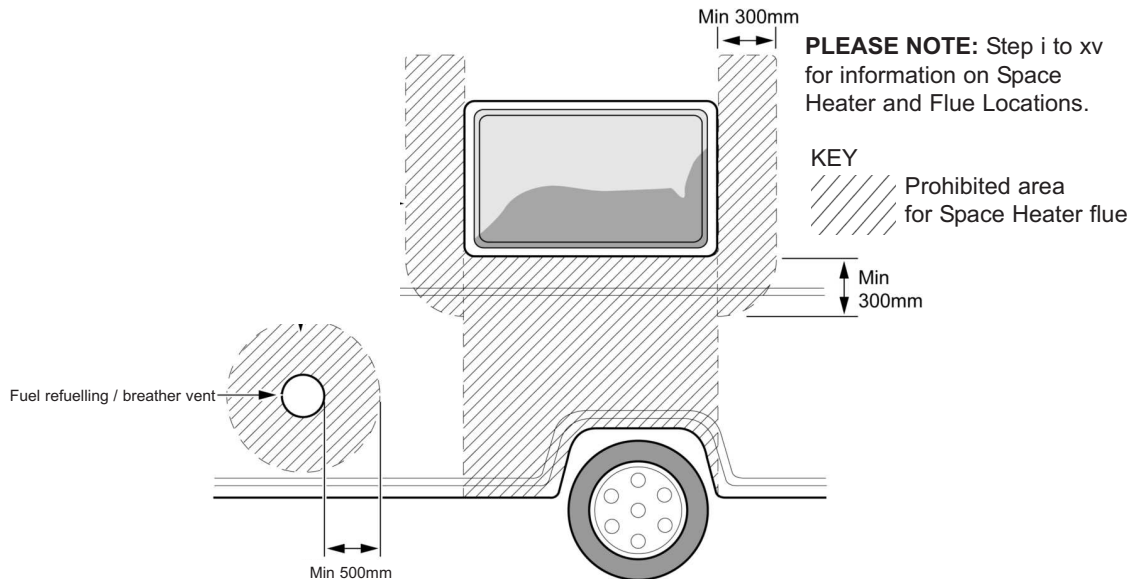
External (Underfloor) Installation - Front View - SH2211 / SC2211
